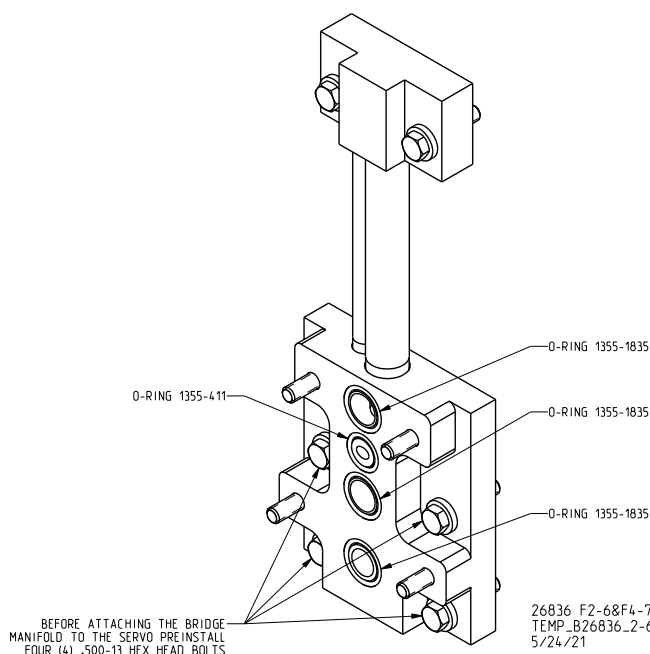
Bridge Manifold O-Ring Locations (Servo Side)
